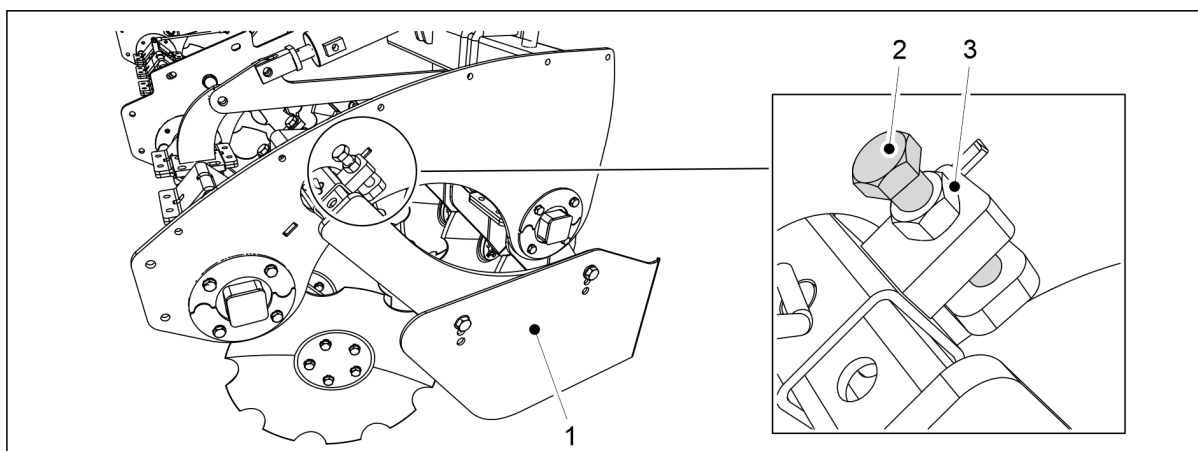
194. Adjusting the lower position of side limiters
